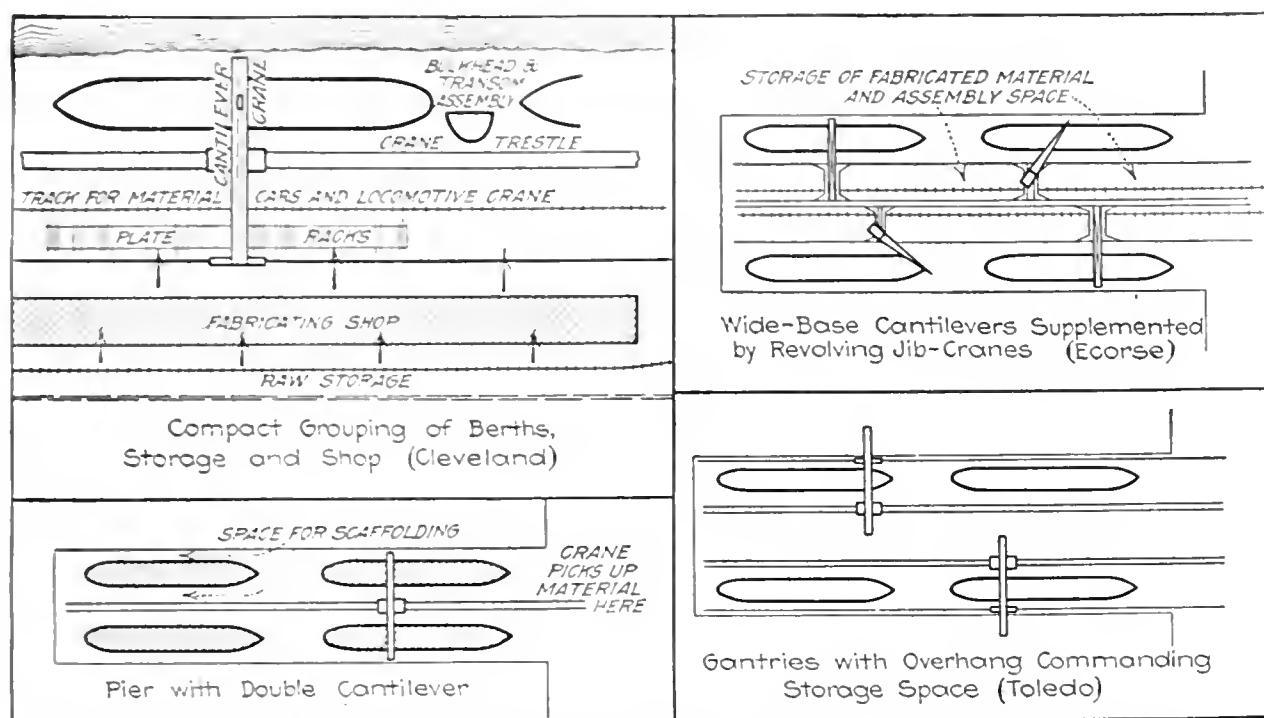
STORAGE AND HANDLING OF MATERIAL AT BERTHS ARE AFFECTED BY CRANE TYPE AND ARRANGEMENT
